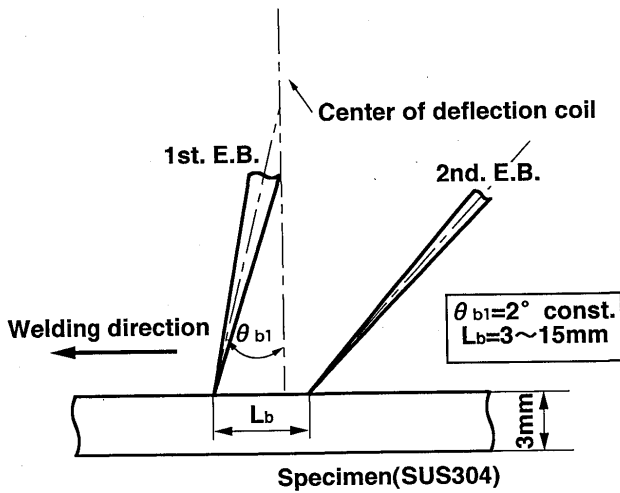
Tandem Electron Beam welding condition for high speed welding.
